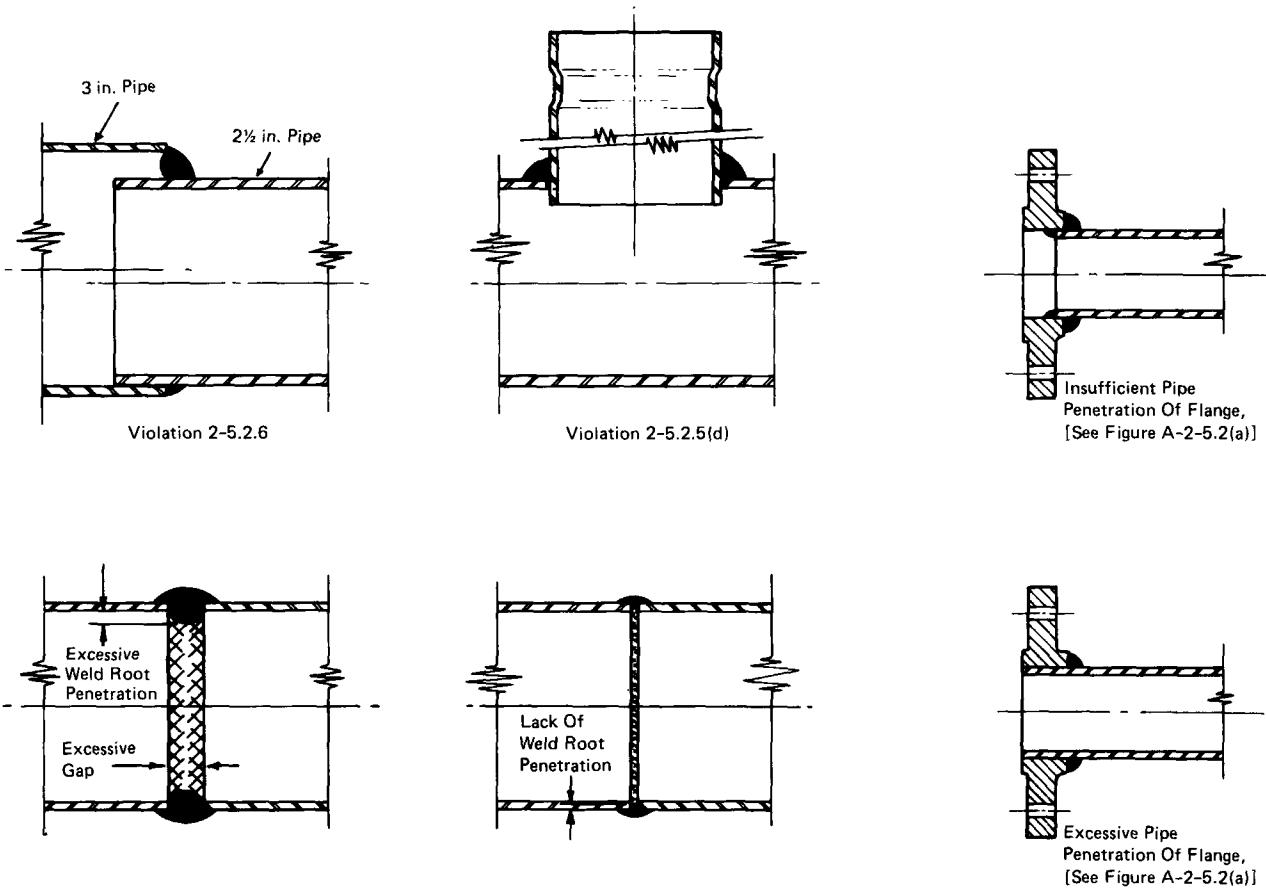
(b) Unacceptable weld joints.
